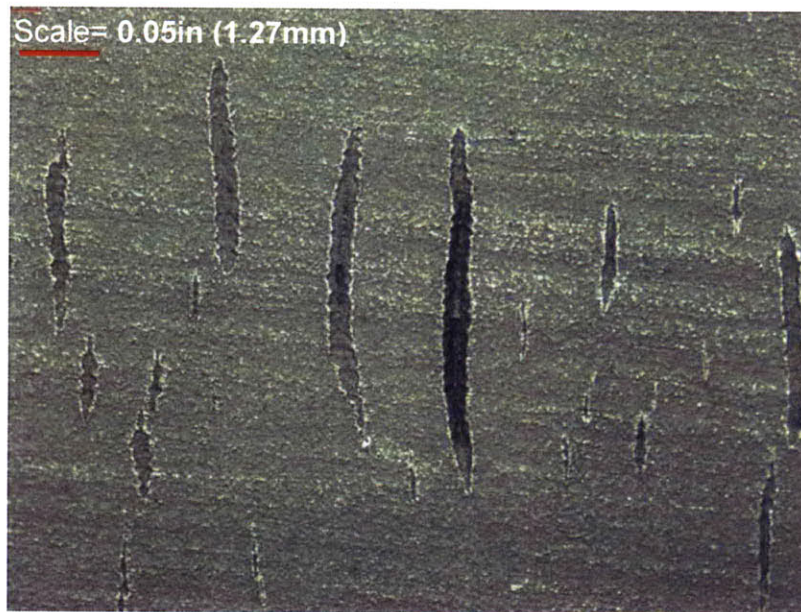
Stereomicroscope image of the duct segment surface cracks. Image size is 0.5 x 0.375 in. (12.7x9.5mm)
